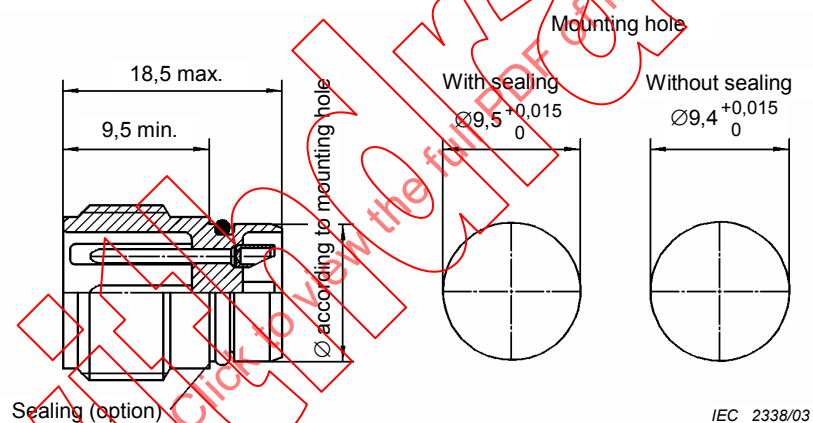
Tube insert mounting with thread M12x1, male contacts
